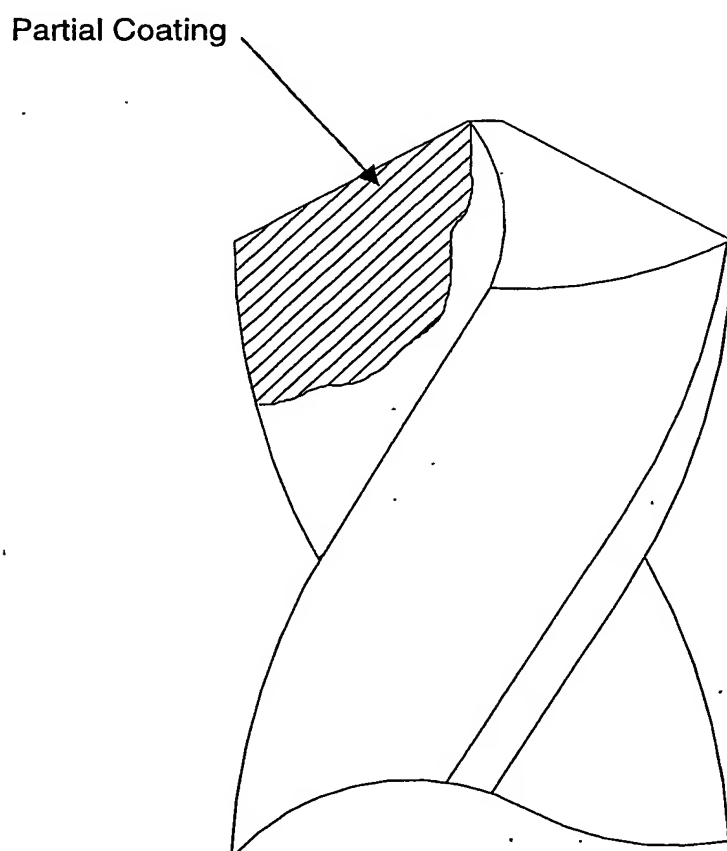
A partially coated drill tool. The coating is applied only to the rake face.
